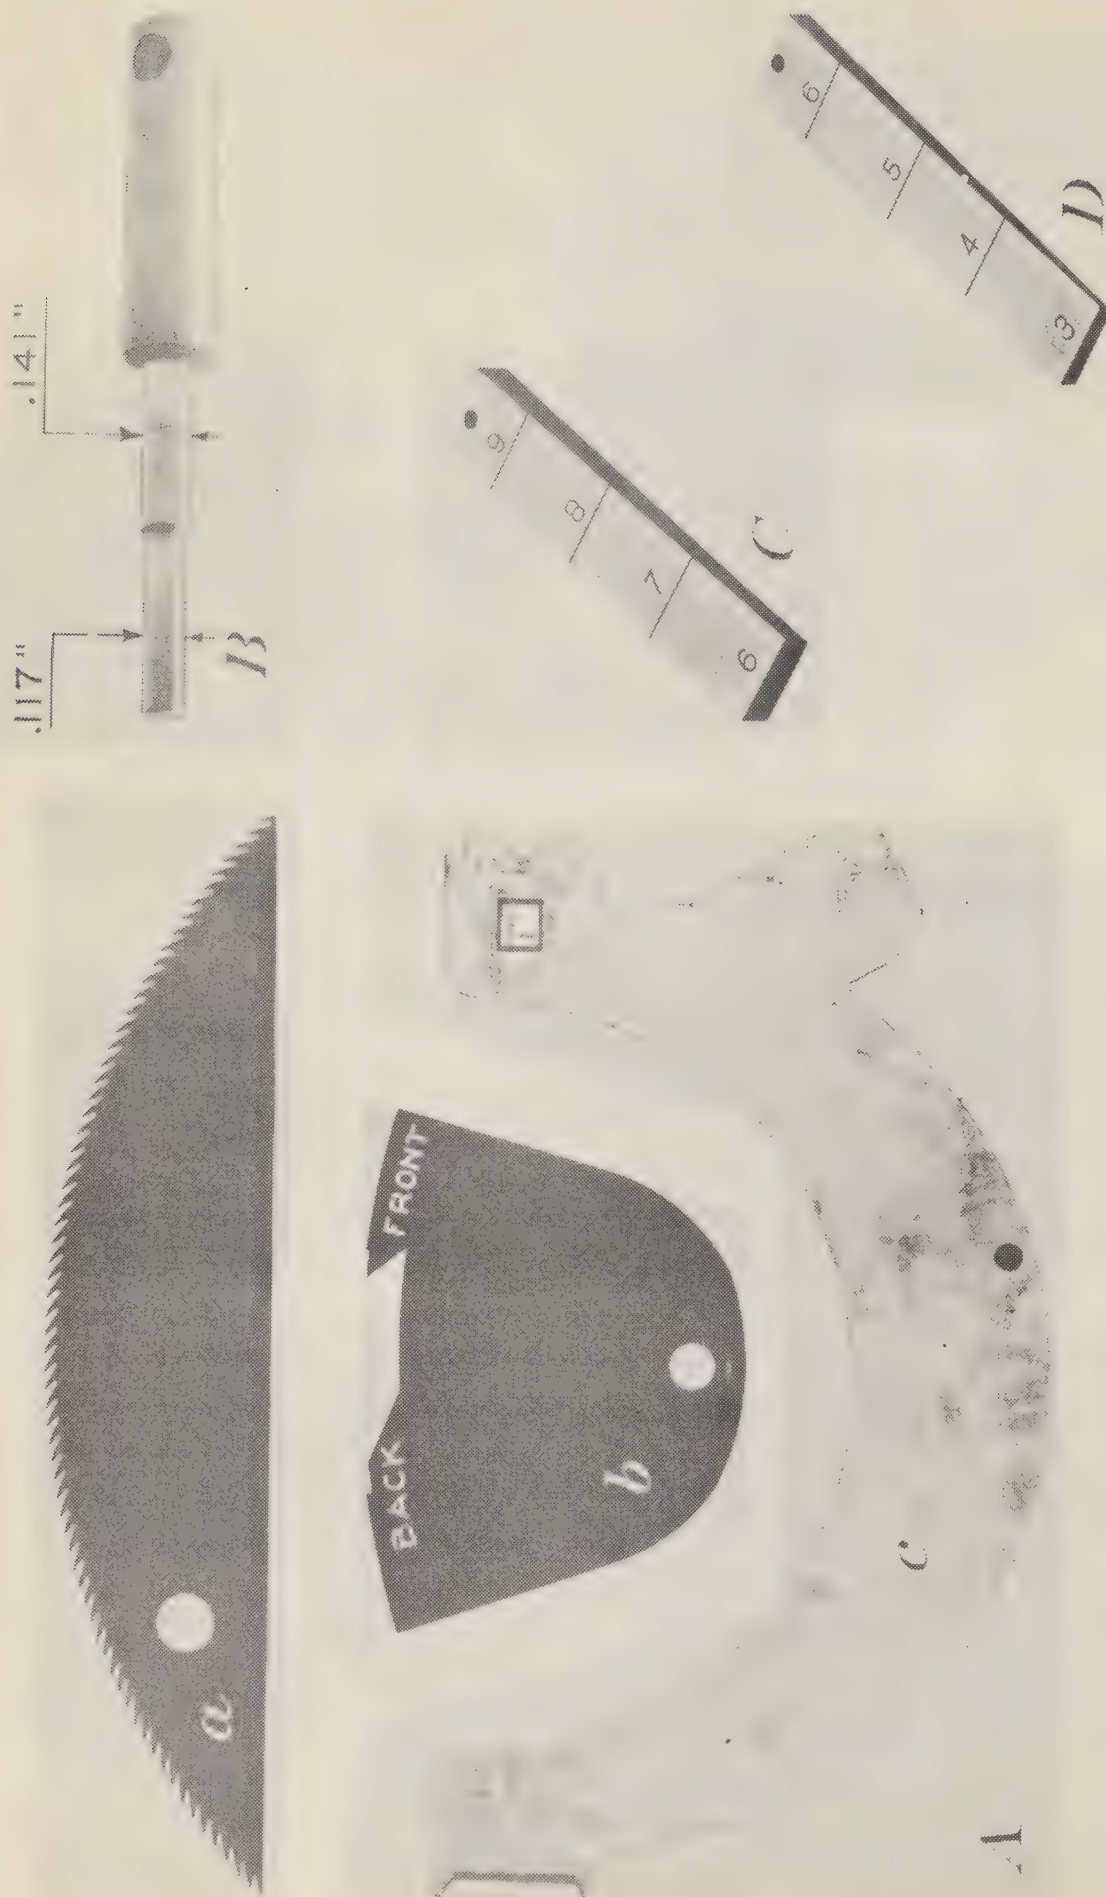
Inspection Gages. A, Gin-saw gages, (a), segment of factory saws, (b), tooth pitch and shape gage, and (c), saw diameter gage; B, rib spacing gage; C, nozzle width gage; and D, nozzle clearance gage. In C and D numerals indicate thicknesses at marks in thirty-seconds of an inch.
